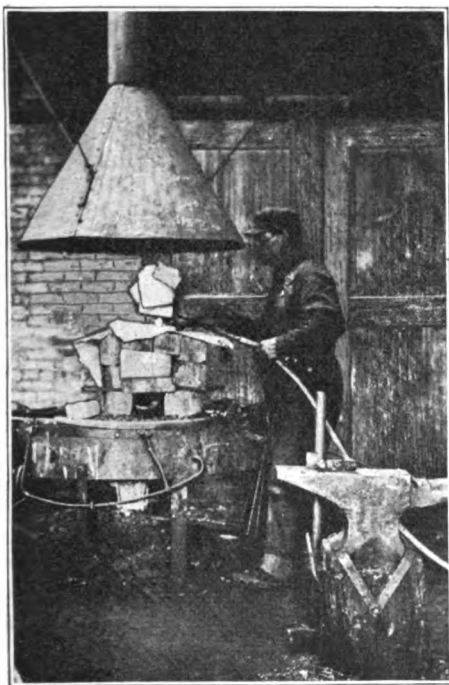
Blacksmith Forge Is Handy for Heating Automobile Castings.
